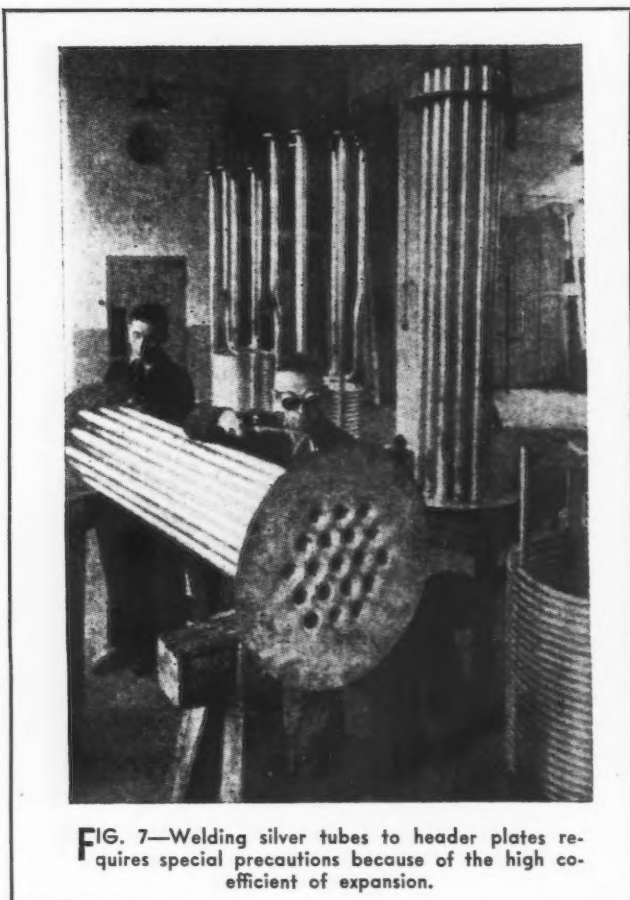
Welding silver tubes to header plates requires special precautions because of the high coefficient of expansion.
